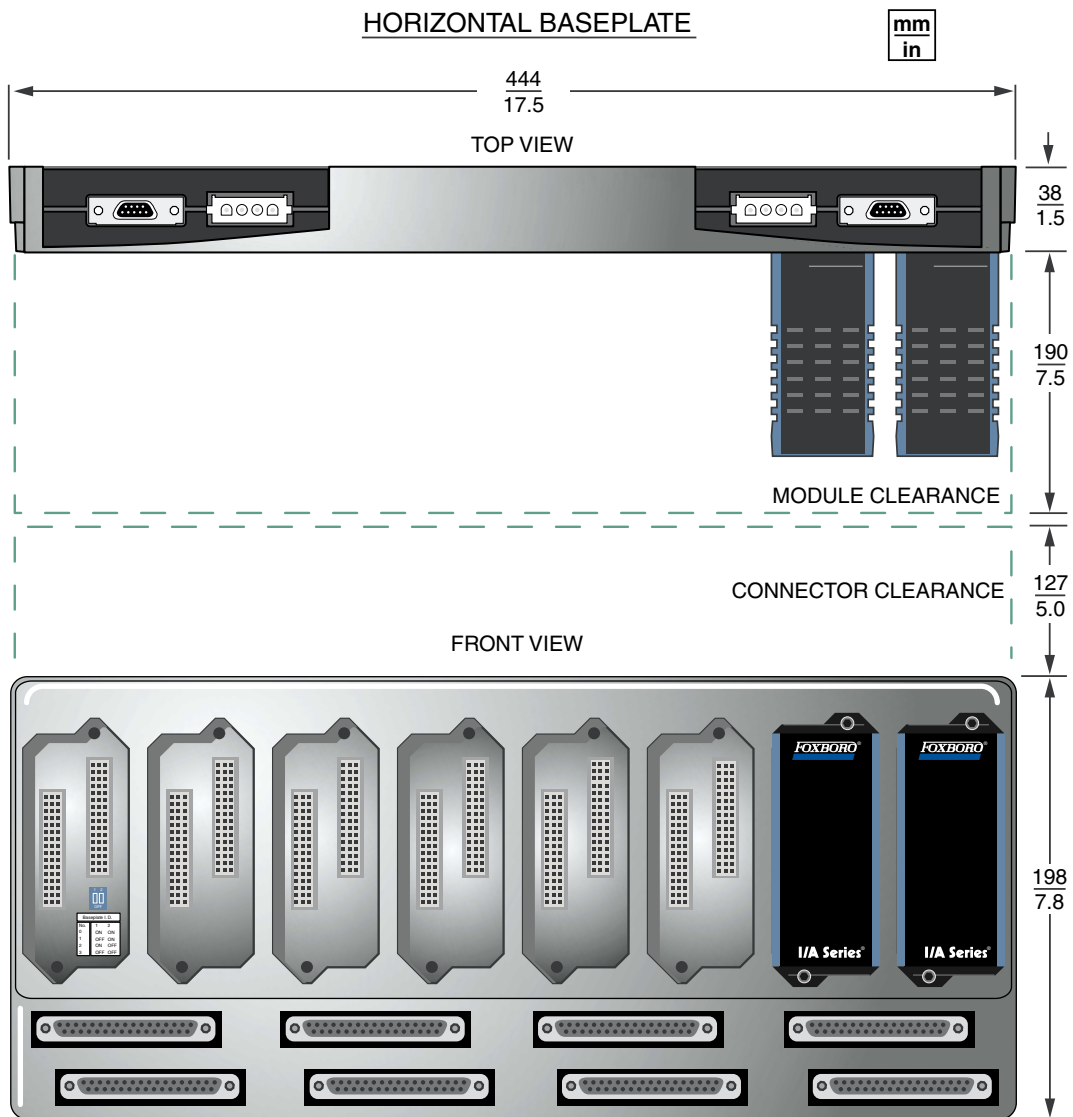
Baseplate Dimensions for Horizontal DIN Rail Mounting
